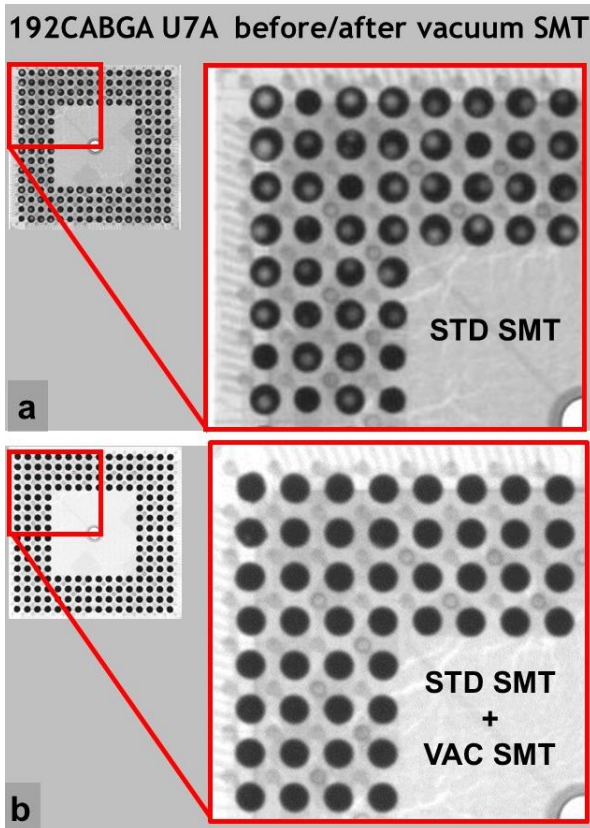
Transmission x-ray images of a) a typical heavily voided 192CABGA after SMT assembly and b) the same 192CABGA with solder voiding eliminated by subsequent vacuum reflow processing.
